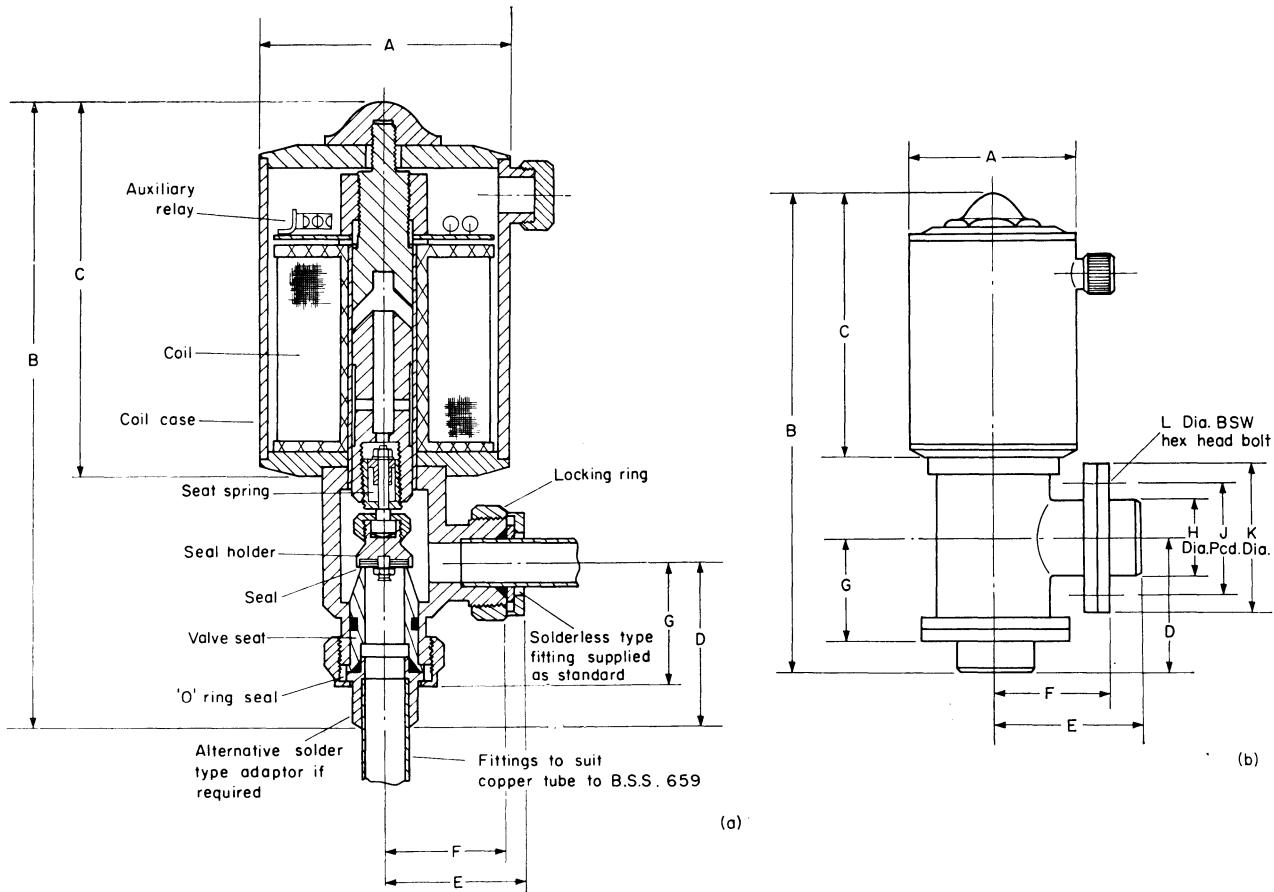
Electromagnetic valves supplied by Genevac⁴⁴¹: (a) cross section; (b) dimensions (Table 6.23).
